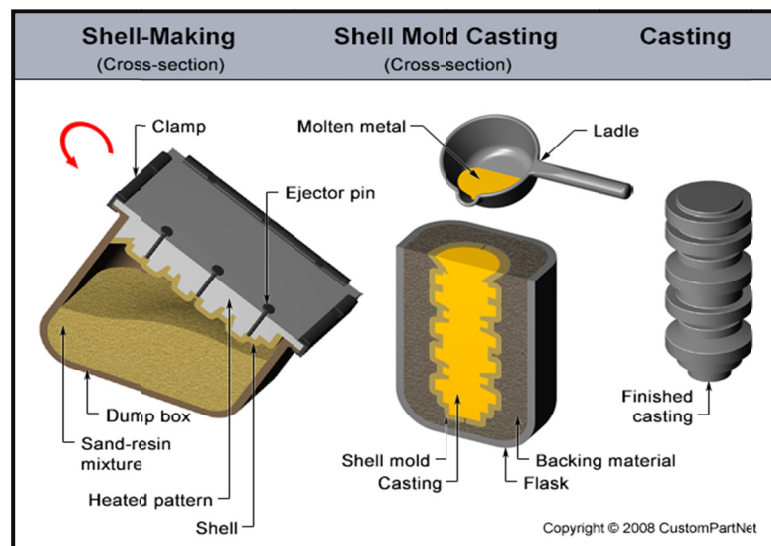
Shell-mold casting components and process <www.shelmetcastings.com>
